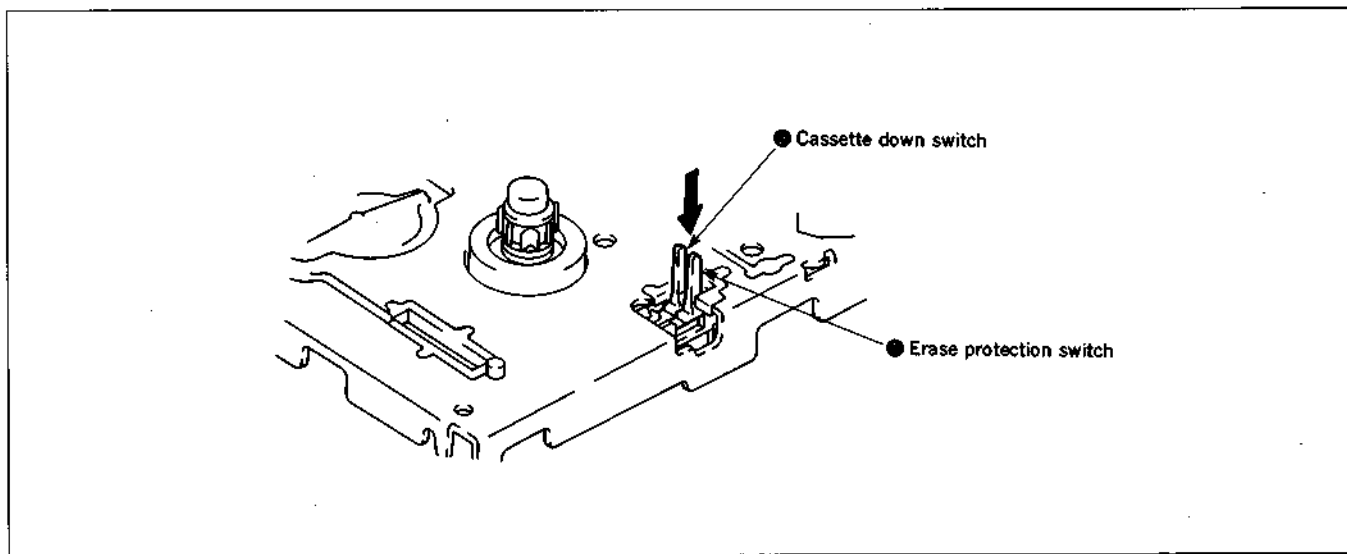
How to complete tape threading with FL cassette compartment removed
